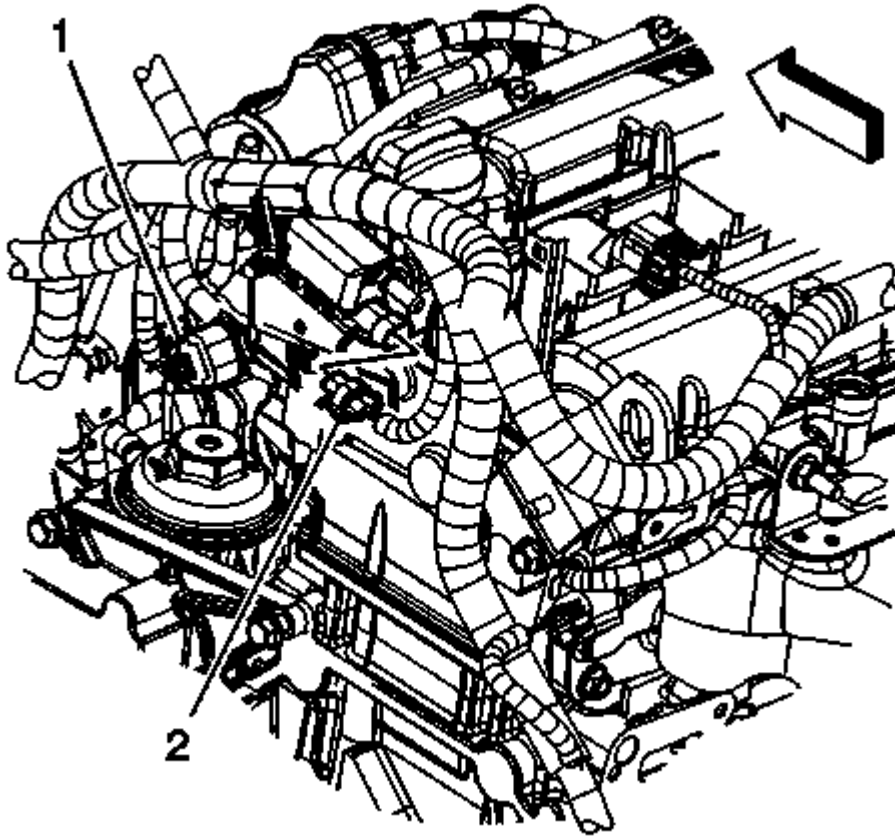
Identifying Engine Wiring Harness Electrical Connector
